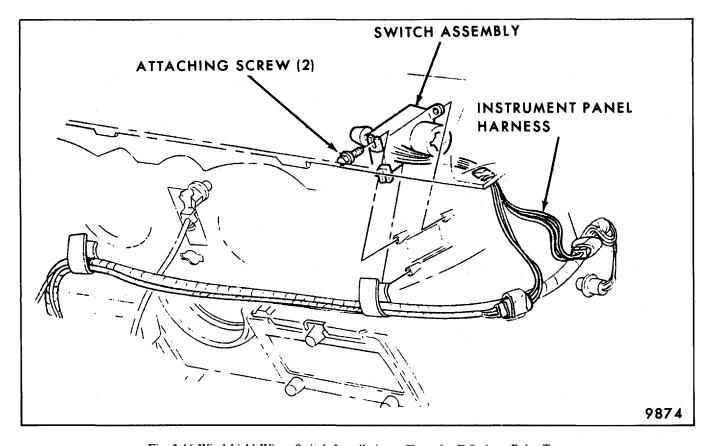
Windshield Wiper Switch Installation - Chevrolet F Styles - Pulse Type
